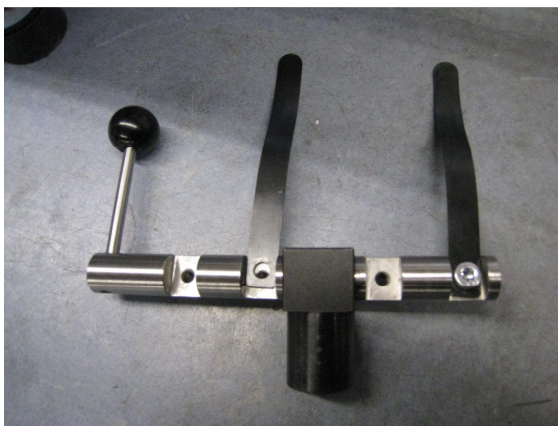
ASSEMBLY OF CLAMPING DEVICE
